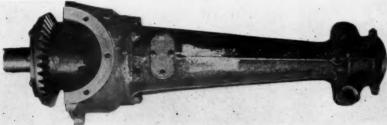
The Pinion Flange Housing, Completely Disassembled, Excepting Pinion Shaft Shown in Fig. 13. In the Reassembly It is Most Important That Hole in Inner Pinion Bearing Sleeve Aligns With That in Housing
